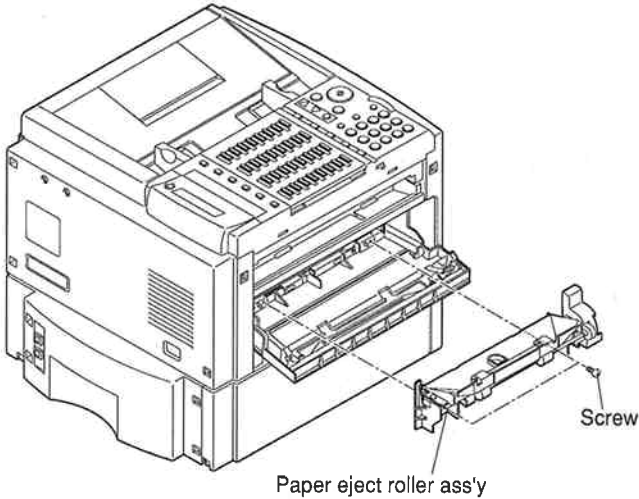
Disassembly Procedure (Paper Eject Roller Ass'y)
